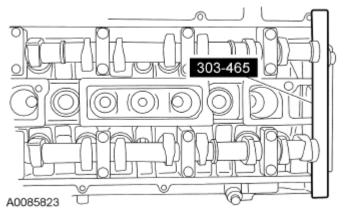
Identifying Camshaft Alignment Plate (303-465) Courtesy of FORD MOTOR CO.
